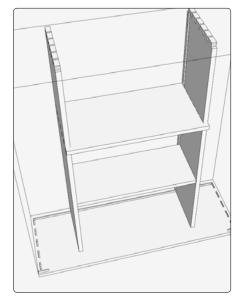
Lengthen the right end of the bottom component to the bounding box.
